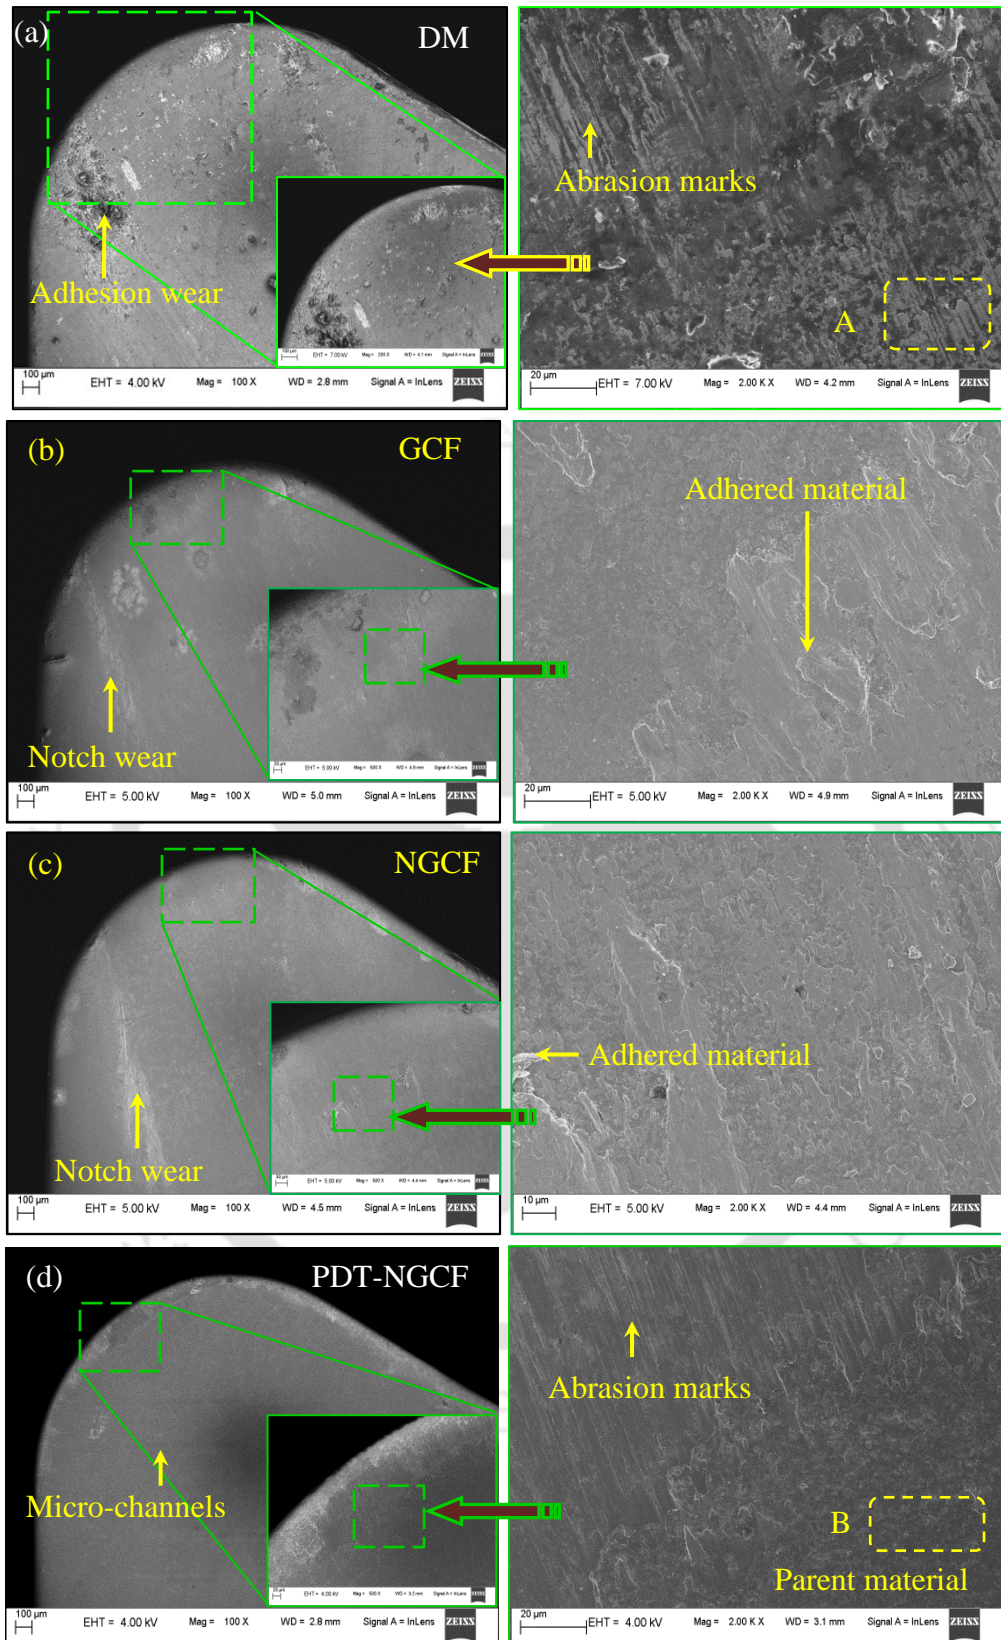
Cutting tool rake surface morphology showing tool-chip interface during (a) dry machining, machining using (b) green cutting fluid, (c) nano-green cutting fluid and (d) perpendicular texture cutting tool with nano-green cutting fluid
